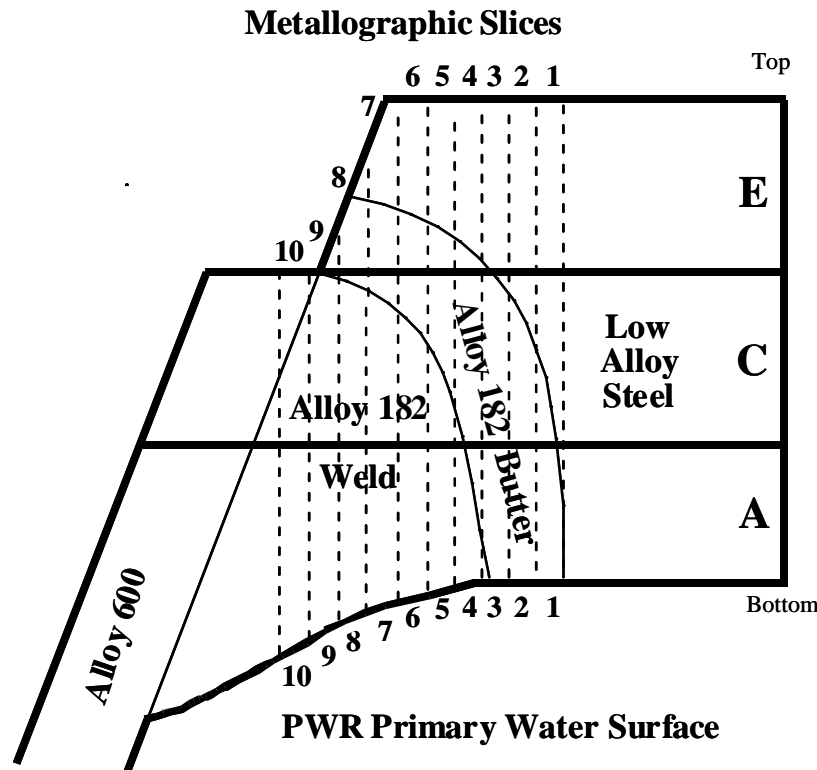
Top and Bottom Surfaces for Pieces A and C Are Shown Along with Highlighted Cracks and Proposed Serial Sectioning. The bottom surface for piece A was exposed to primary water during PWR service.
